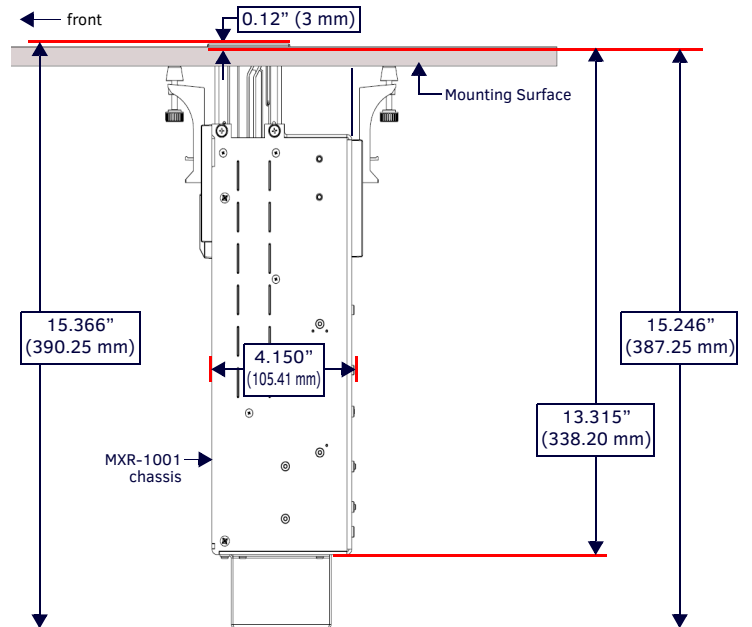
DIMENSIONS OF THE MXR-1001 (SIDE VIEW, BELOW THE MOUNTING SURFACE)
